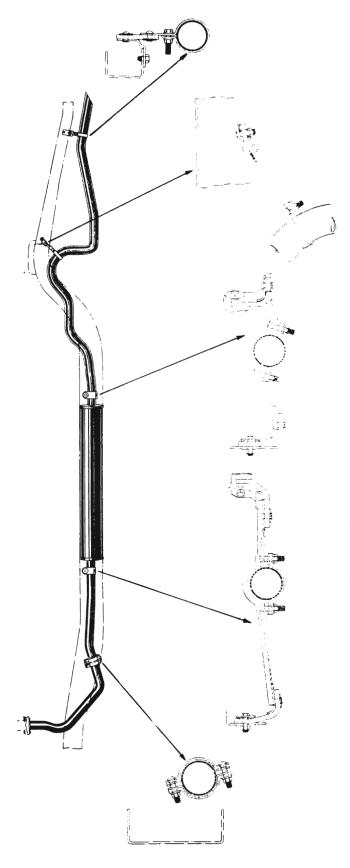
Exhaust System Mountings—Series 40, Single Carburetor
